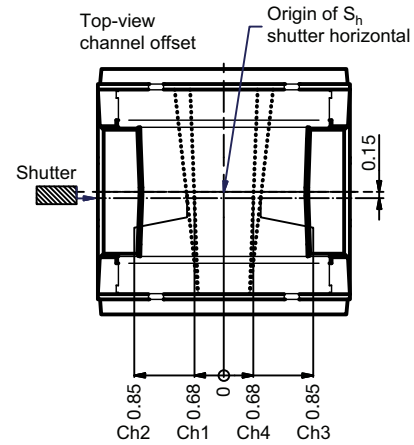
Top View Sensor, Channel Positions and Origin of Horizontal Shutter, tolerances ± 0.2 mm
